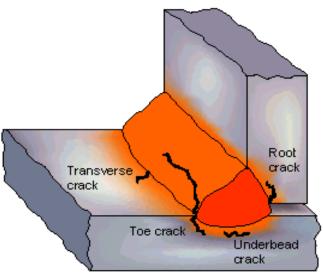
Hydrogen cracks originating in the HAZ (note, the type of cracks shown would not be expected to form in the same weldment)
